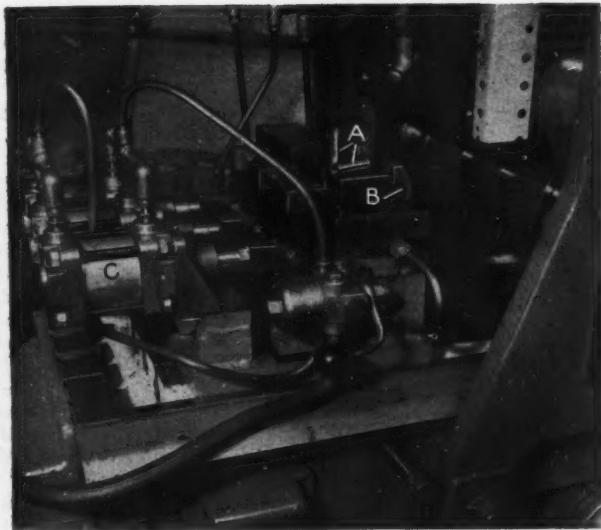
Close-up view of the machine in Fig. 1, showing the toggle-action clamps and the three milling cutters
